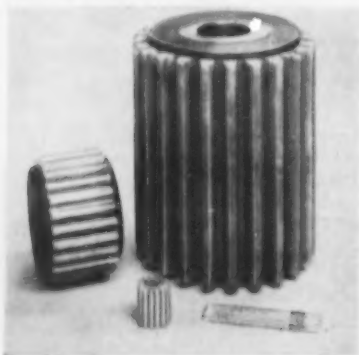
Nylon gear wheel with steel inserts made by centrifugal casting
